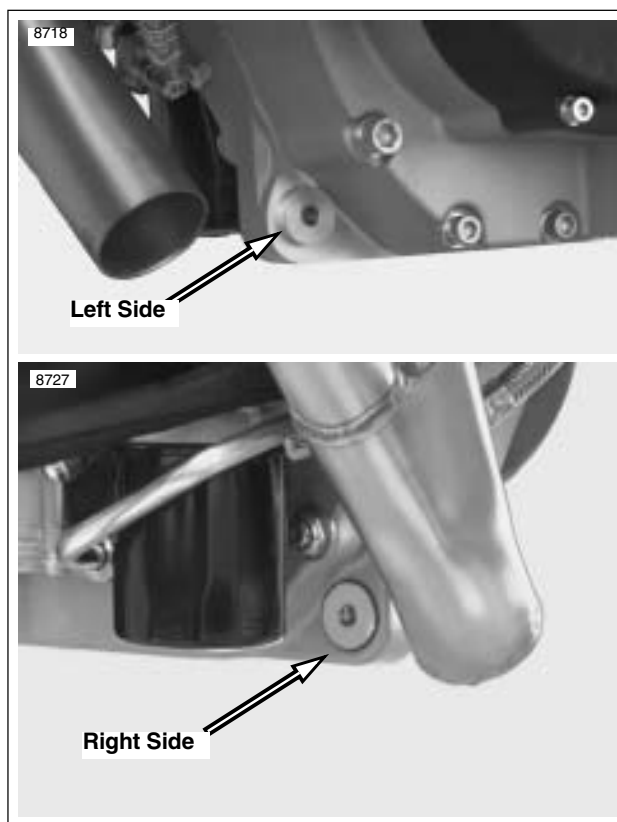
Front Exhaust Mount Bushings (2 piece)
